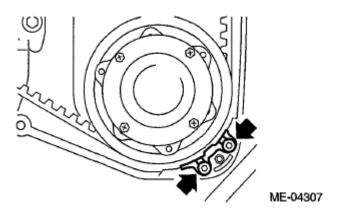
Locating Timing Belt Guide Bolts (3 Of 4) Courtesy of SUBARU OF AMERICA, INC.
